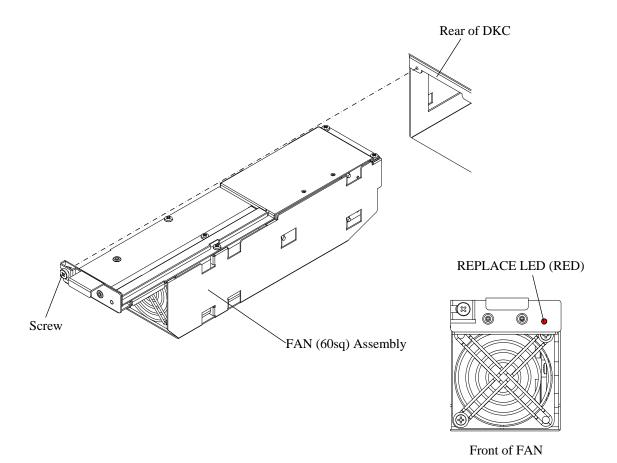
Replacement of FAN (60sq) Assembly
